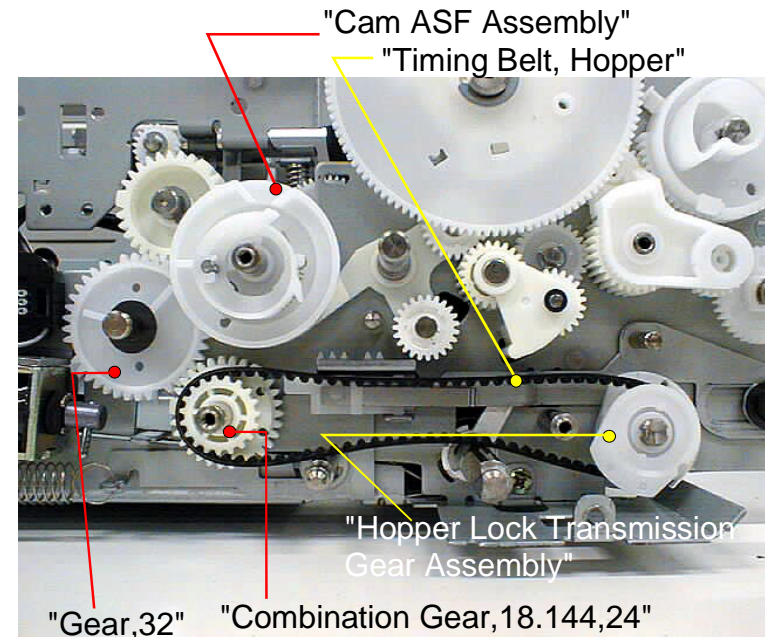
"Cam ASF Assy", "Timing Belt, Hopper", "Gear,32", "Combination Gear,18.144,24" and "Hopper Lock Transmission Assy" Removal
